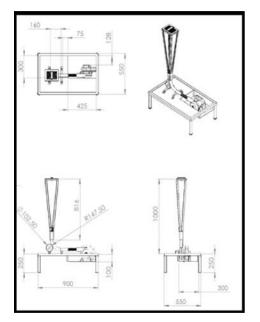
Design dimensions of instrument (dimensions in mm)
